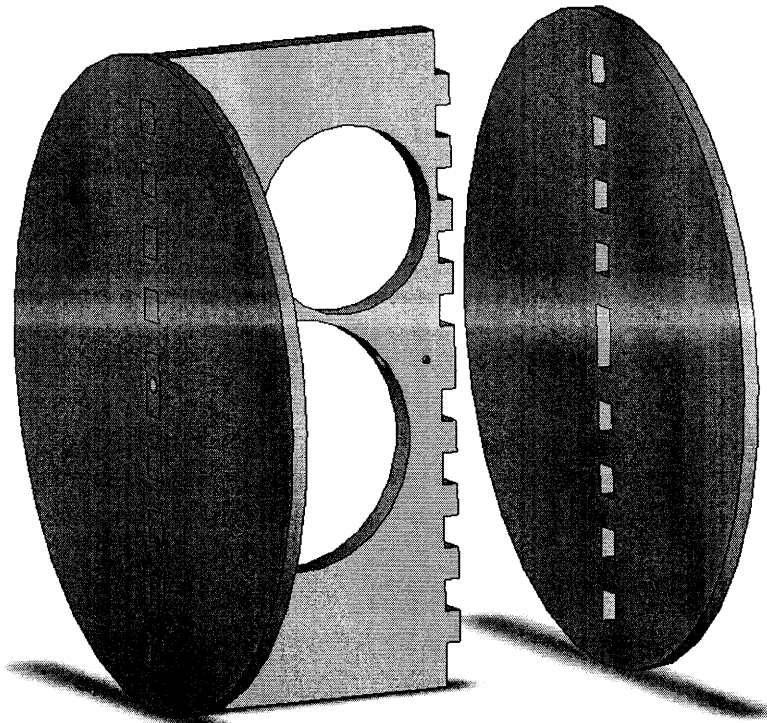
Solid model of comb-like press fit fastening method of housing plates.
